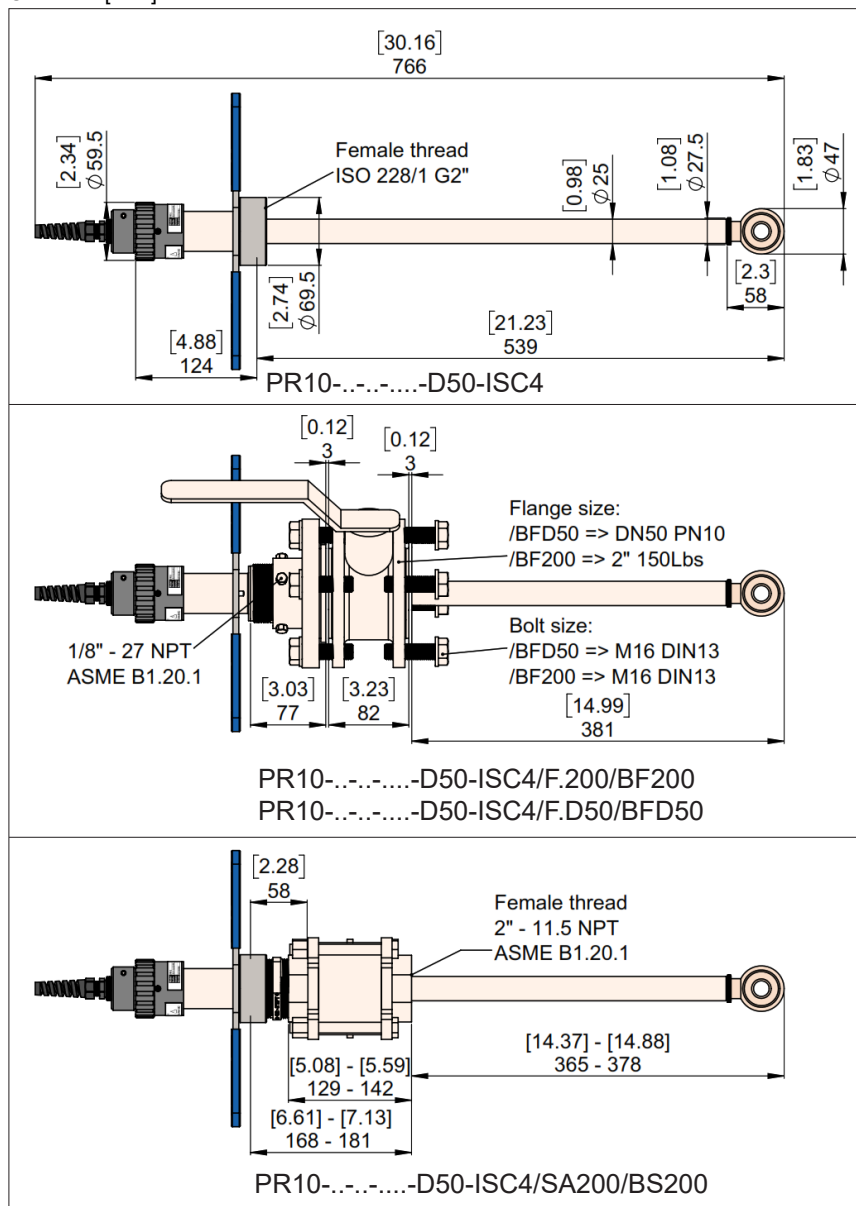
Dimensional drawing PR10...-D50 with mounted FU20 sensor
